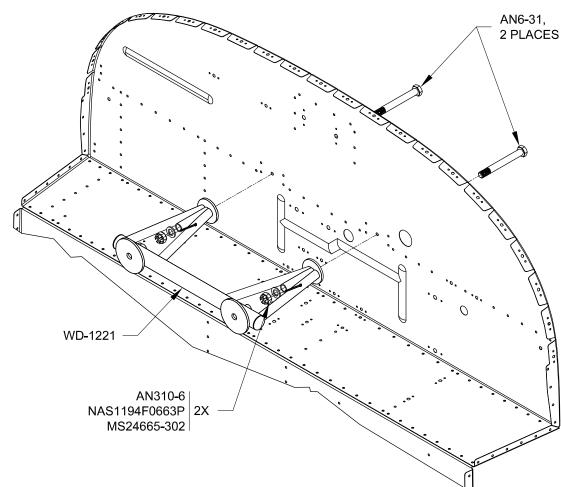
ATTACHING THE ENGINE MOUNT STANDOFF
